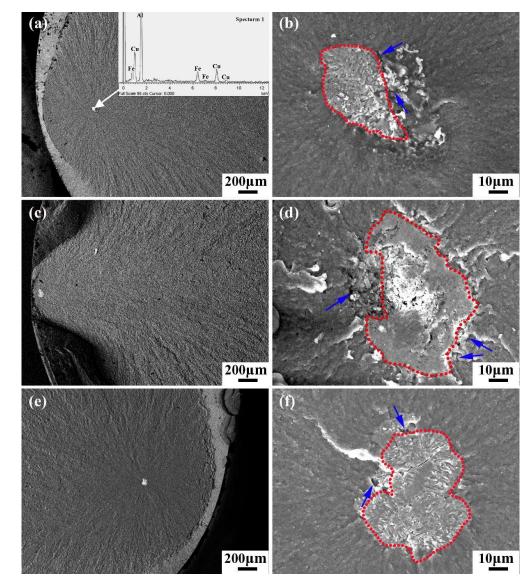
SEM images showing the fatigue crack initiation sites on the fracture surfaces of
